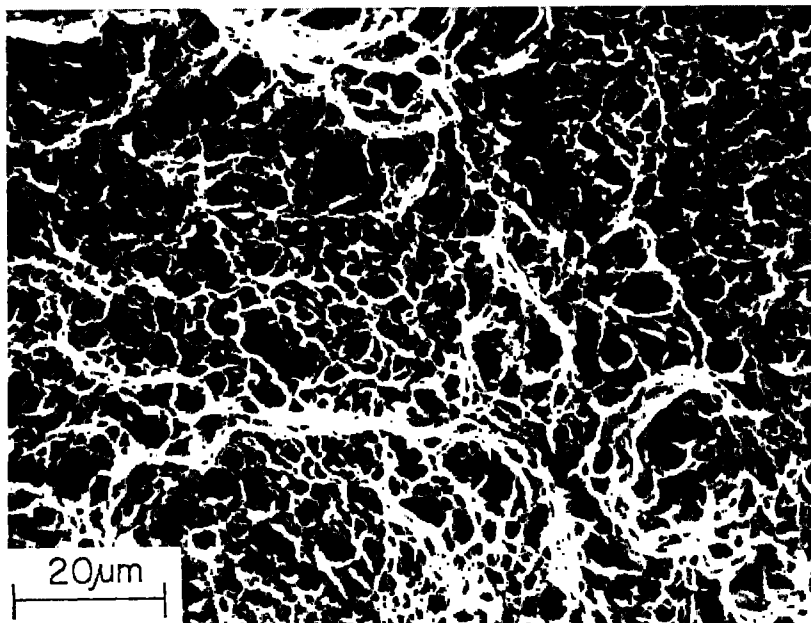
Code-H specimen: fast-fracture area showing MVC
